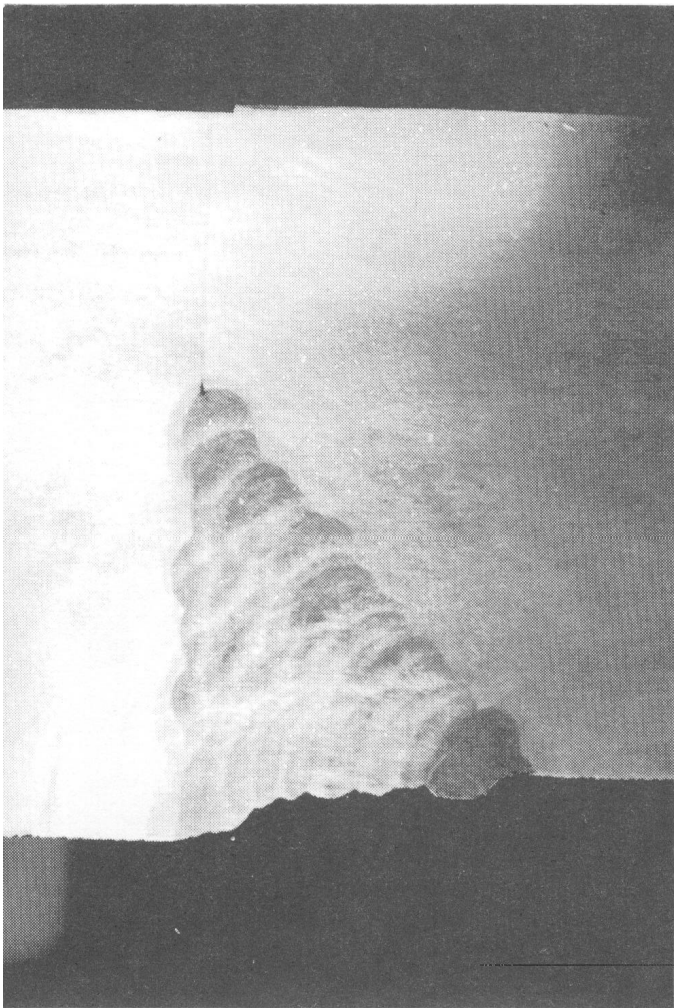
Polished and etched half penetration weld on a thick flange.
